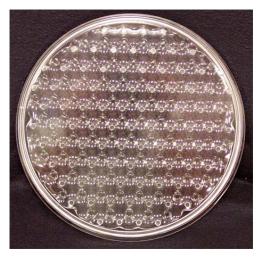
Early borosilicate corrugated mirror blank prototype: 254 mm diameter, 3-layer, 1.1mm thick face sheets, and 6.35mm deep corrugation
